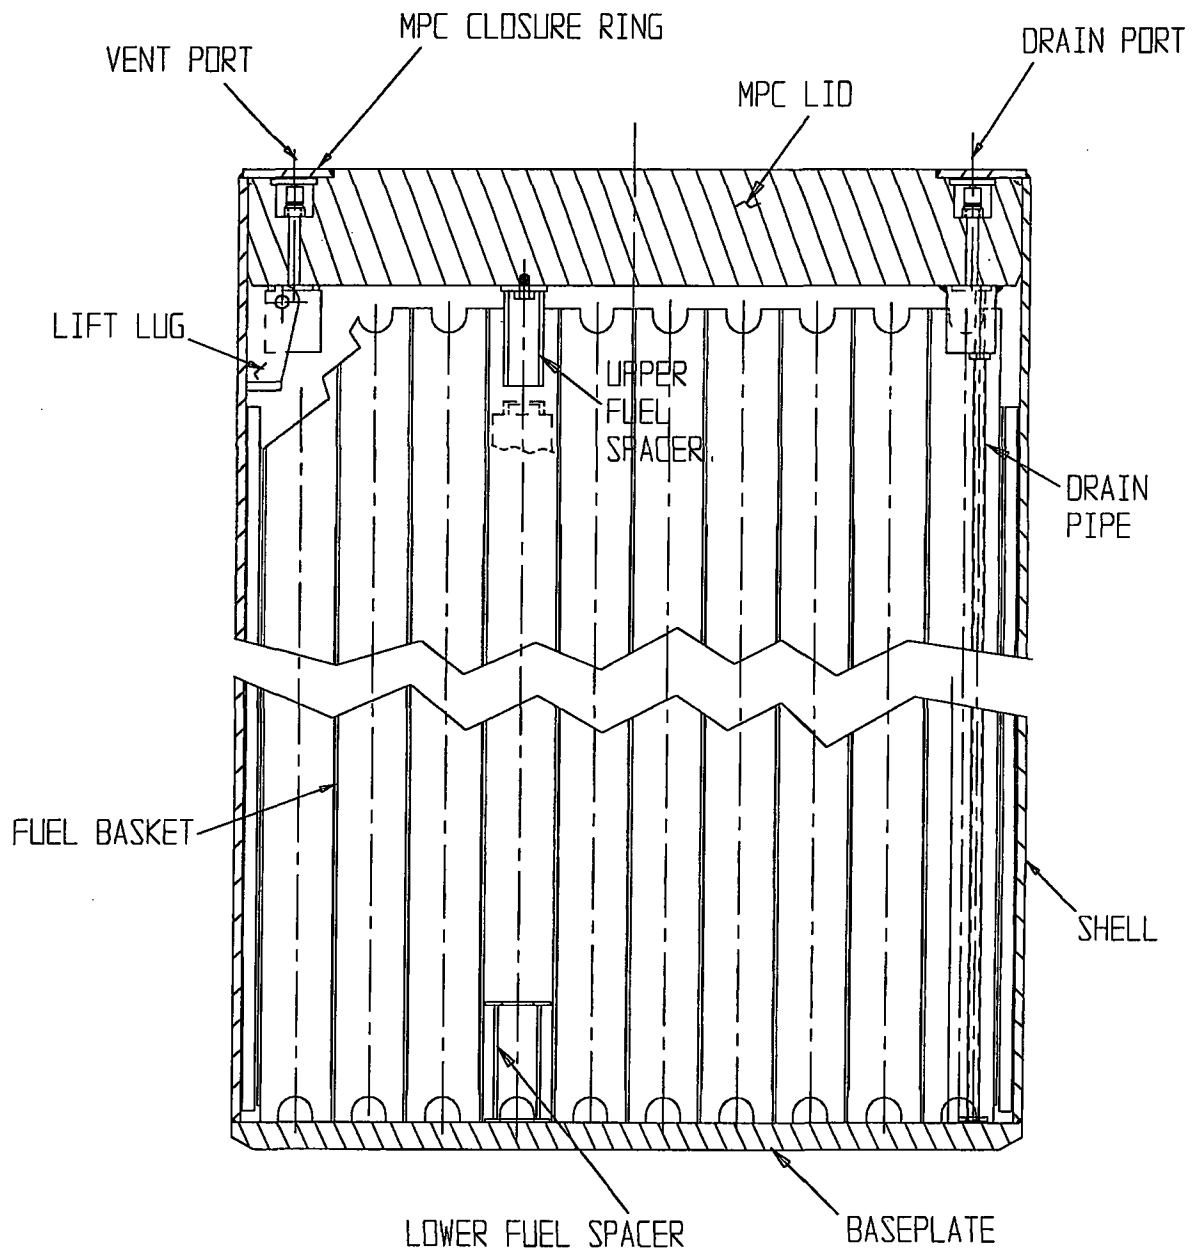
; CROSS SECTION ELEVATION VIEW OF MPC
